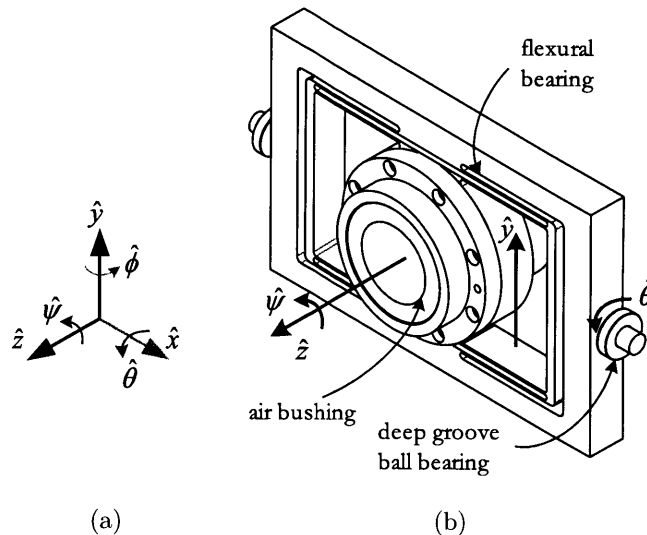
Degrees of freedom for end bearings of a simply supported shaft. (a) Desired Cartesian degrees of freedom at each shaft end point and (b) serial bearing design to provide desired degrees of freedom
